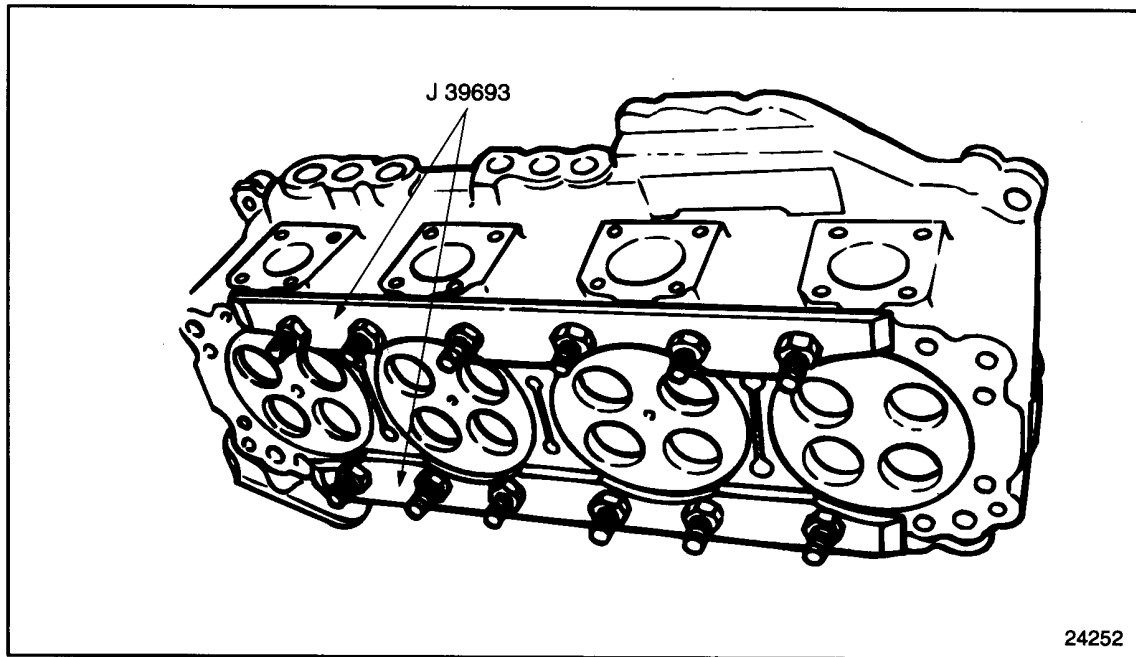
Cylinder Head Pressure Test Equipment Installation
